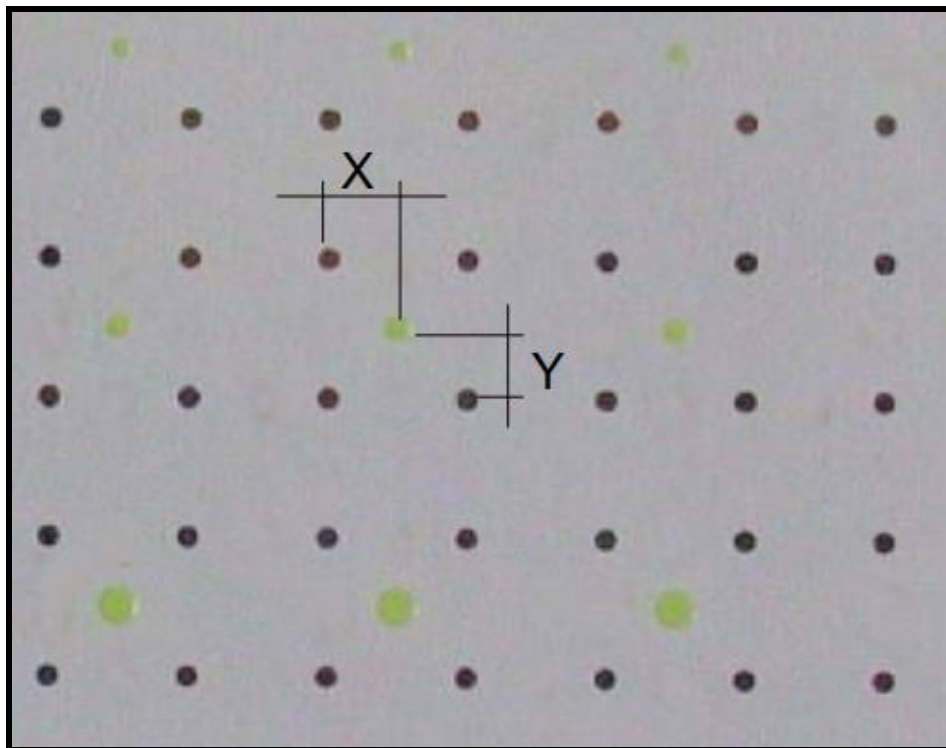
Printed SMT adhesive on a glass board located near measurement objects
